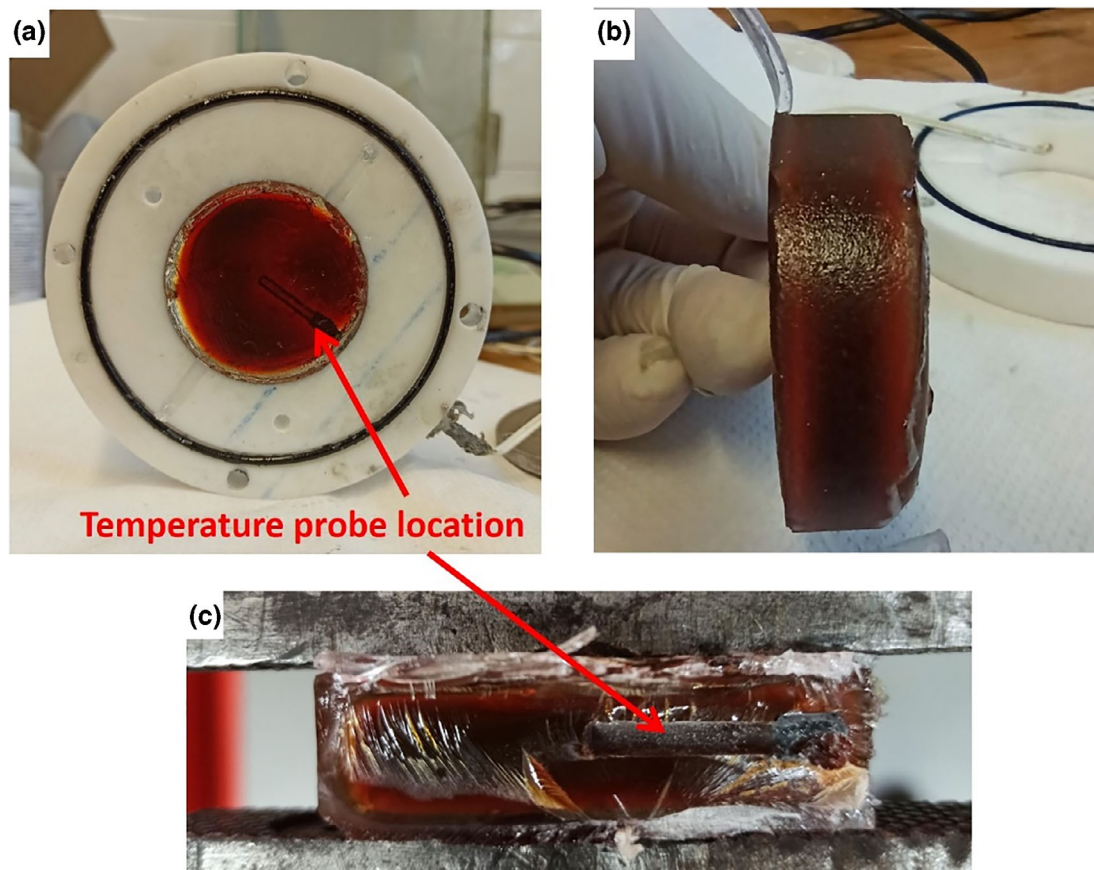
Pictures of a sample processed in the 15.2 mm mold without fillers. (a) Open mold after processing, (b) side view of the sample after removal from the mold, (c) view of the fractured surface of the sample for the removal of the temperature probe [Color figure can be viewed at wileyonlinelibrary.com]
